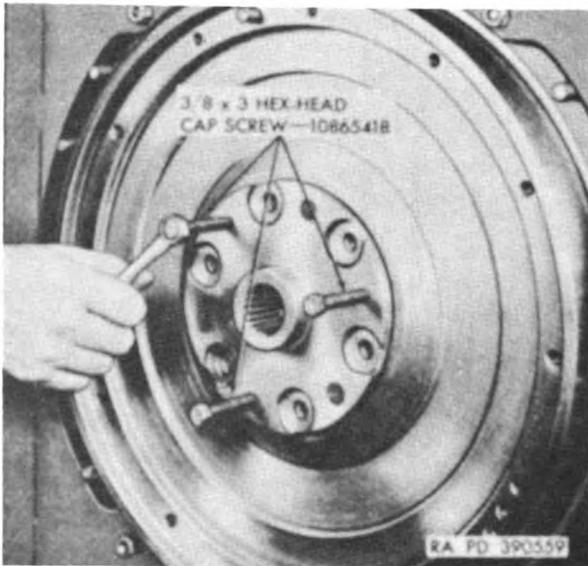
Removing transmission drive hub assembly (model AOSI-895-5 engines only).
